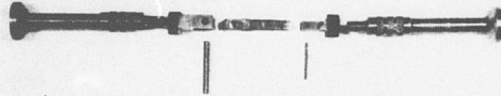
Parts of Test Fixture Used for Tensile Test of Charging Handle Spring. Charge Handle Was Cut Adjacent to Spring End. Pin Used in Slotted Hole Was the Diameter of Carrier Key Plunger. (A Hole Was Drilled at Hook End for Engagement in Test Fixture.)
